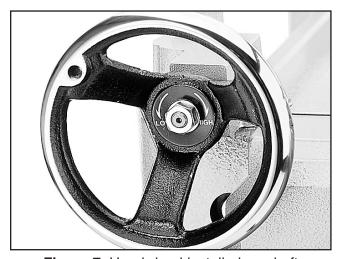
Handwheel installed on shaft (handwheel handle removed for clarity).
